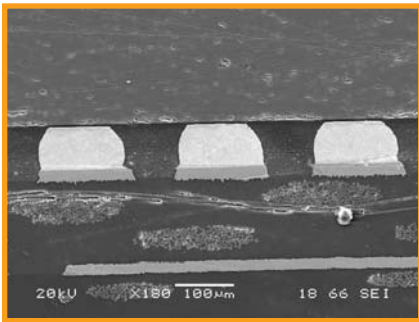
Cross section picture of a good solder joint, Flux K.
